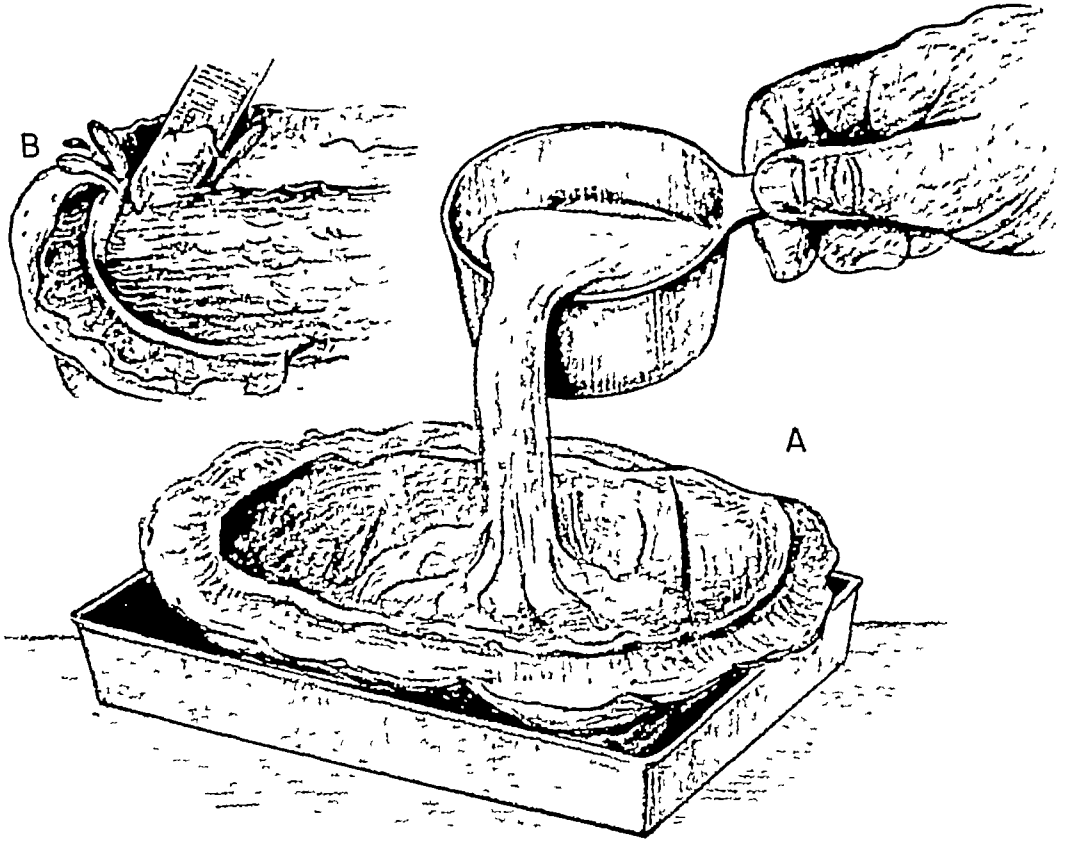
(A) Pouring the hot liquid wax into the mold after the nostrils have been sealed and the mold dried out with absorbent paper or cotton to remove the hot water with which it had been filled (B) The mold filled nearly to the top with hot liquid wax which is splashed up over the brim of the mold to prevent shrinkage away from this edge and so remain natural size
